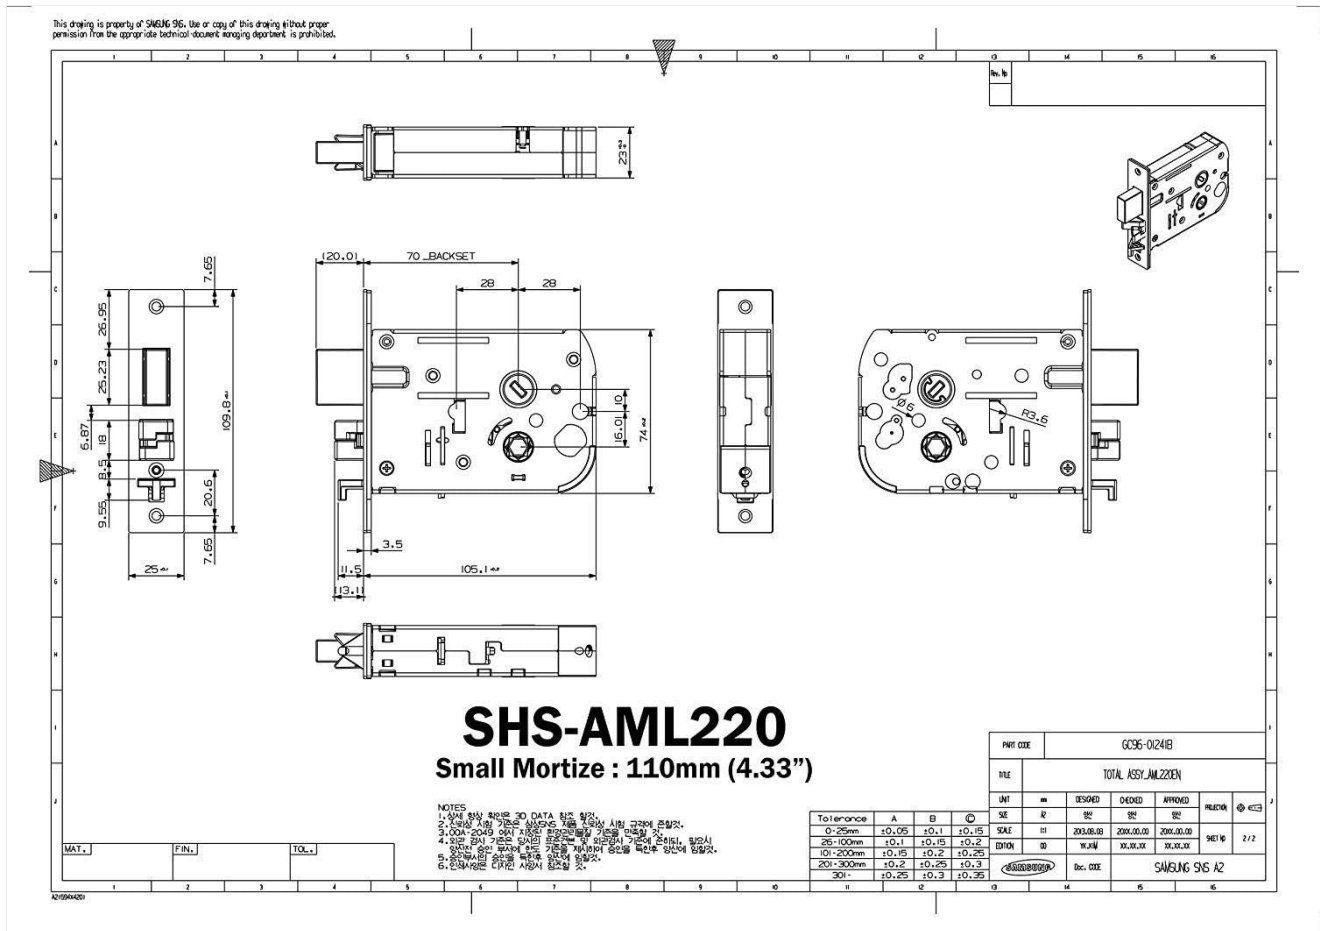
Technical drawing with dimensions for the SHS-AML220 Small Mortise.
